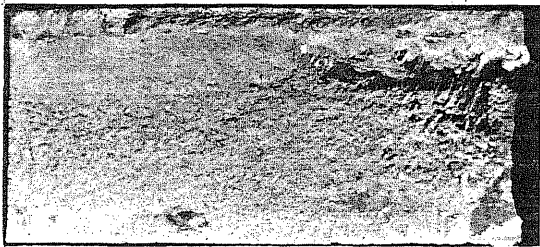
FRACTURE SURFACES OF SOUND WELDED JOINTS
